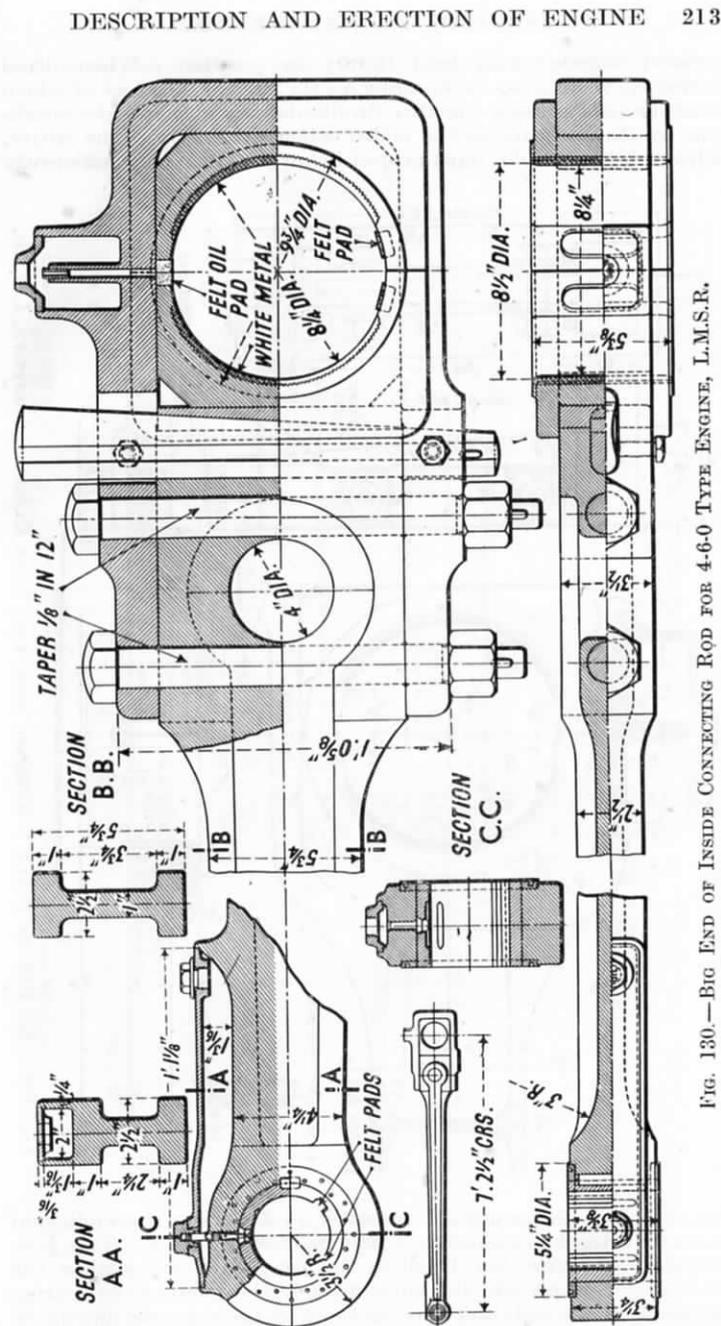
BIG END OF INSIDE CONNECTING ROD FOR 4-6-0 TYPE ENGINE, L.M.S.R.
